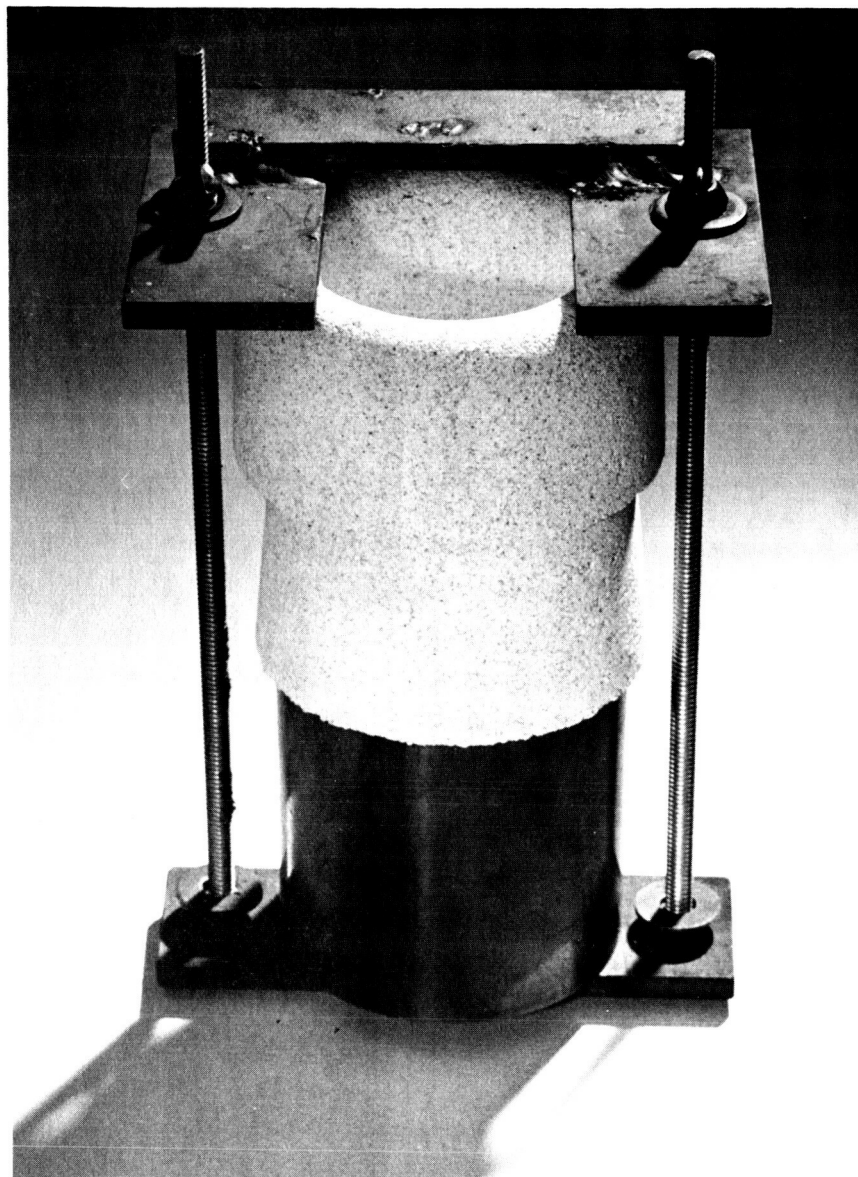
ASSEMBLED COMPOSITE MOLD SHOWING
